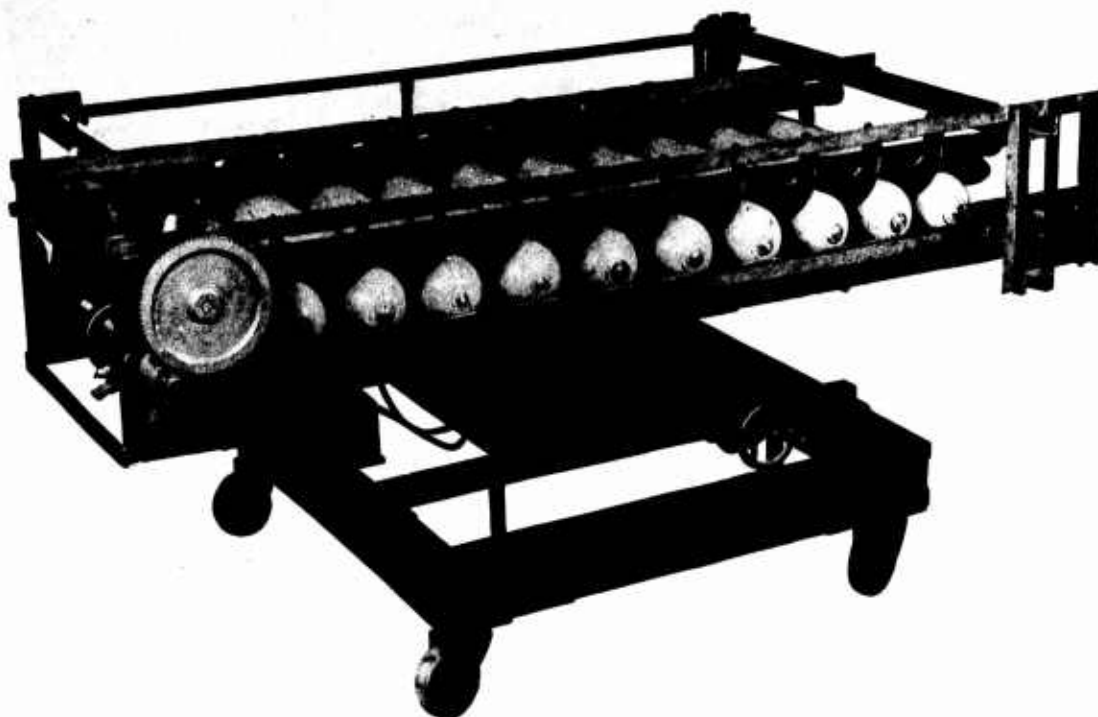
Screw-type power-operated dispenser (preliminary assembly without gear and motor enclosure).
